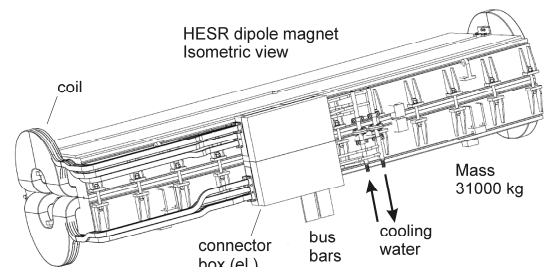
Cut-out of one of the technical drawings of the HESR dipole magnet showing an isometric view of the assembled magnet.
